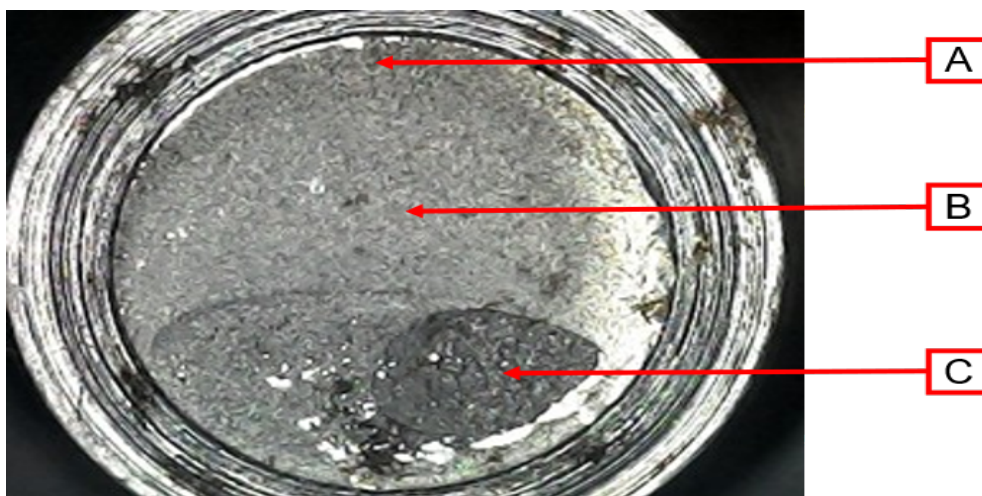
Interface Fracture Specimen Results of Fatigue Testing of VME Bolt Material under 8 kg Load [A] crack initiation area [B] crack propagation area [C] final fracture area
